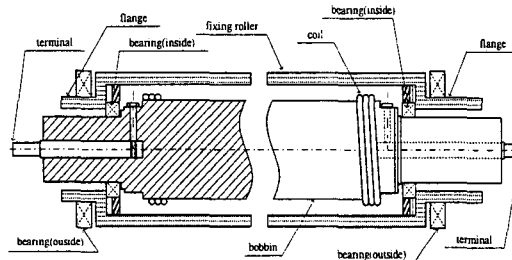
Sectional view of toner fixing roller in copy/printer equipment
